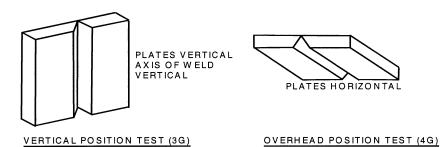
POSITIONS OF TEST PLATES FOR GROOVE WELDS
